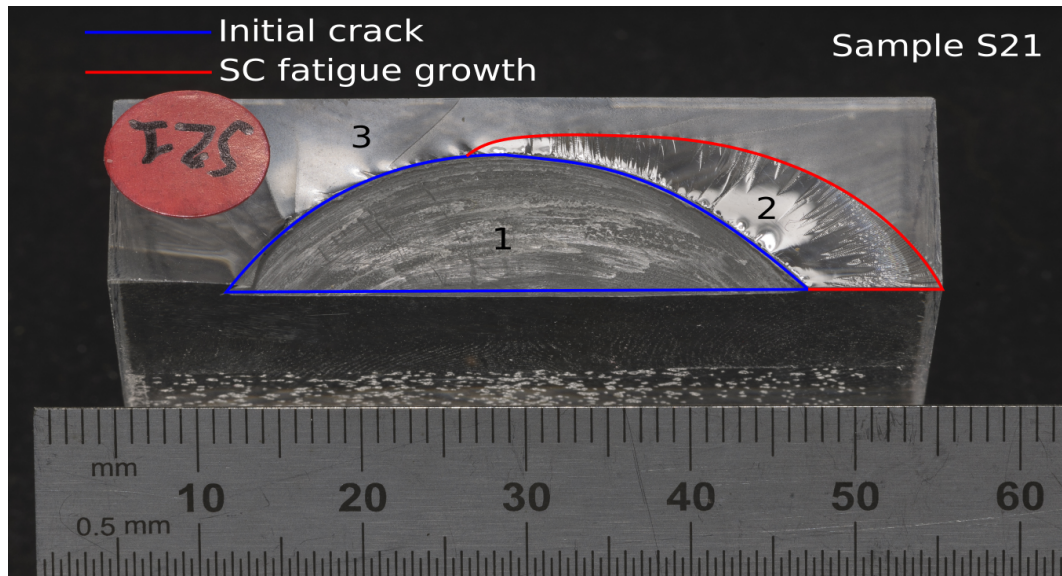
Test on Perspex plate - Fracture surface - Sample S21
